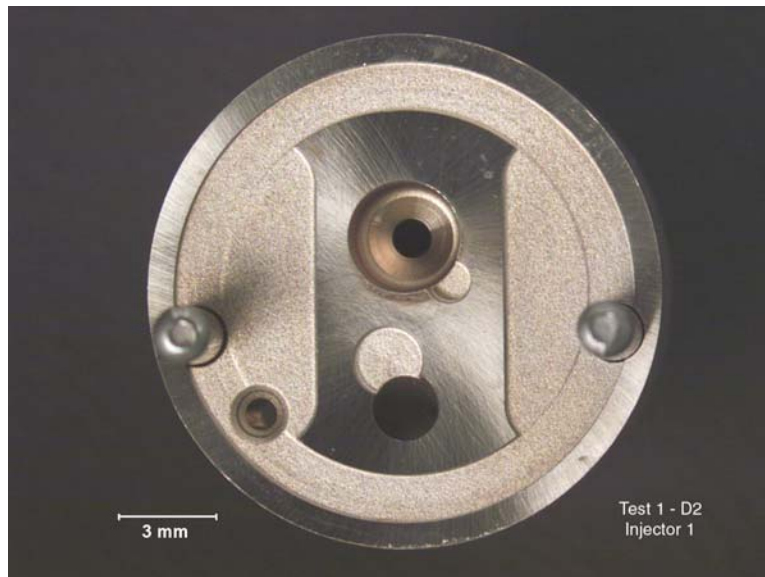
AF7469 ULSD, Control Valve Plate (Bottom)
